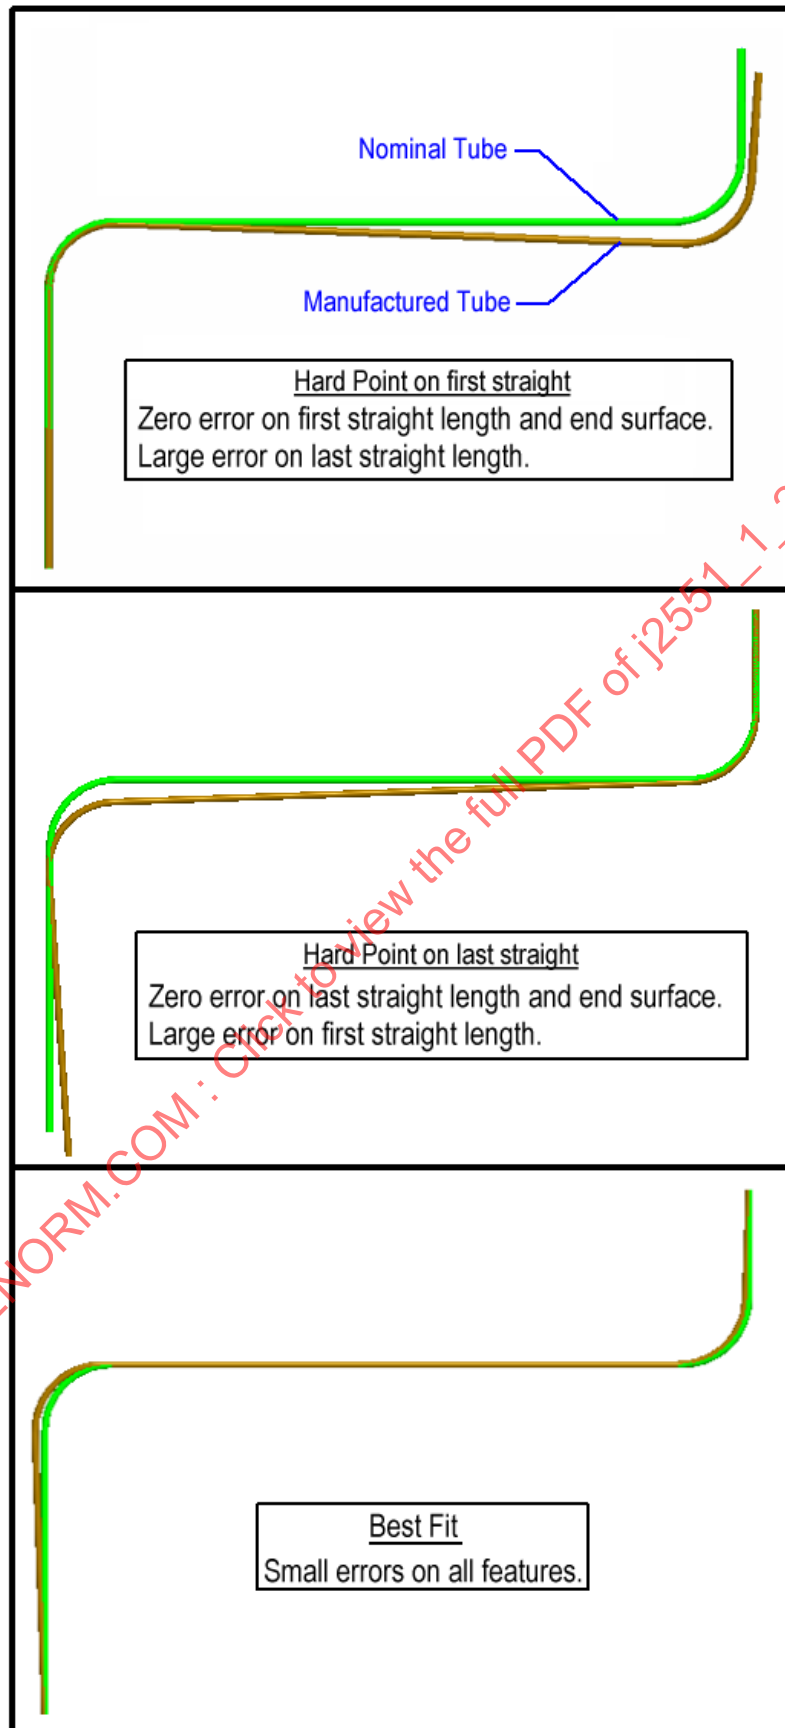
HARD POINT AND BEST FIT VIEWS
